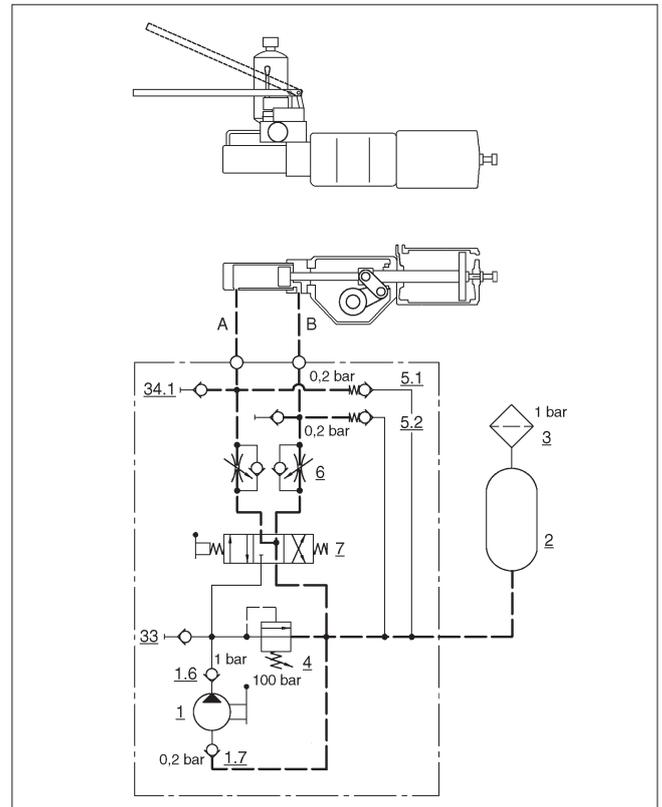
Operating principle of the hydraulic pump unit on remote control
